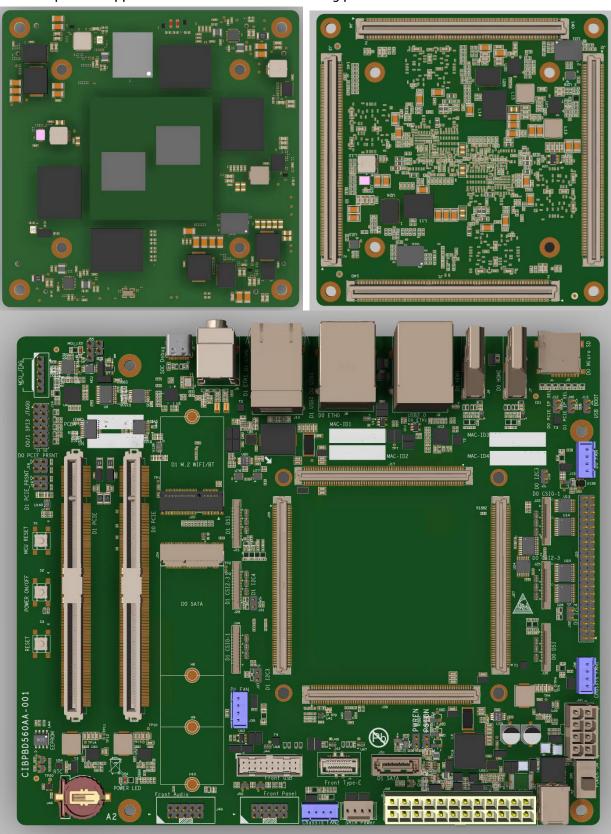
EIC7702X SOM Appearance of core board and bottom board
